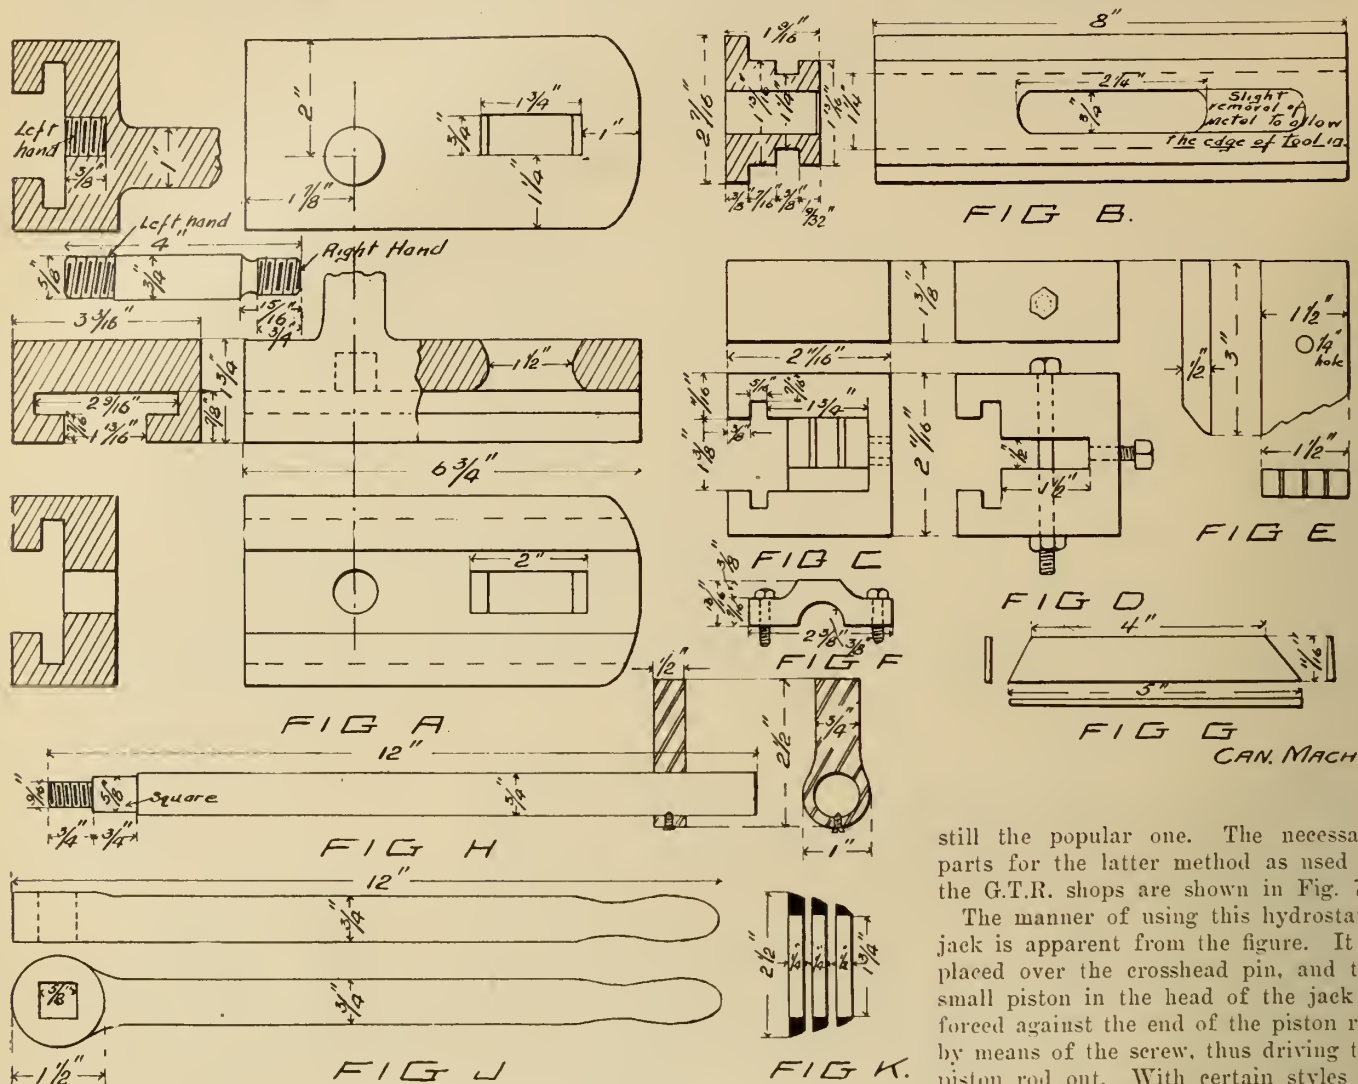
Details of Jig for Producing Sets of Valve Stem Packing.
